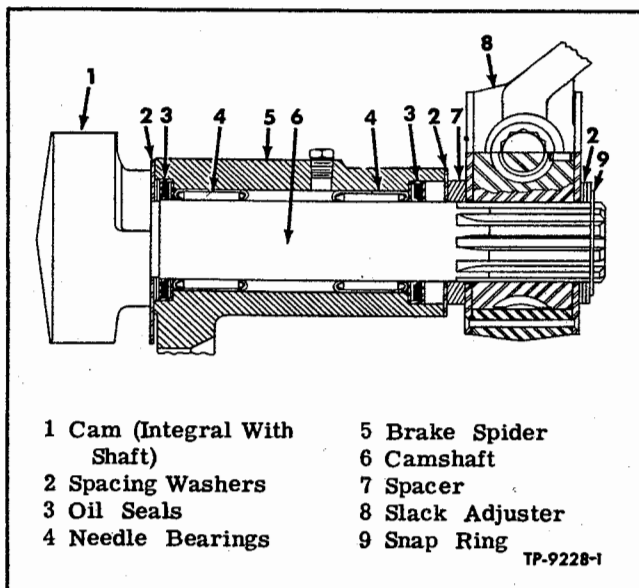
Front Brake Camshaft and Slack Adjuster Mounting
